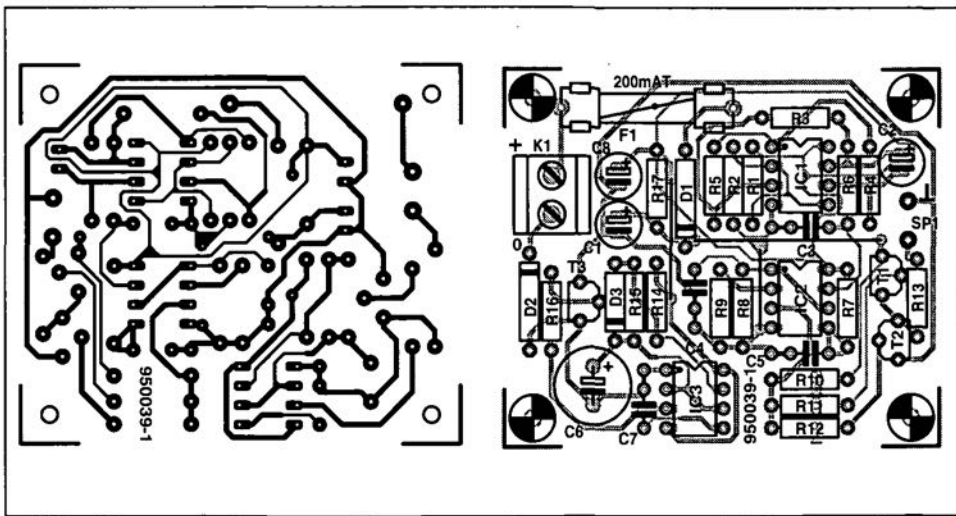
Copper track layout and component mounting plan of the printed circuit board designed for the rodent deterrent (PCB not available ready-made through the Readers Services).
